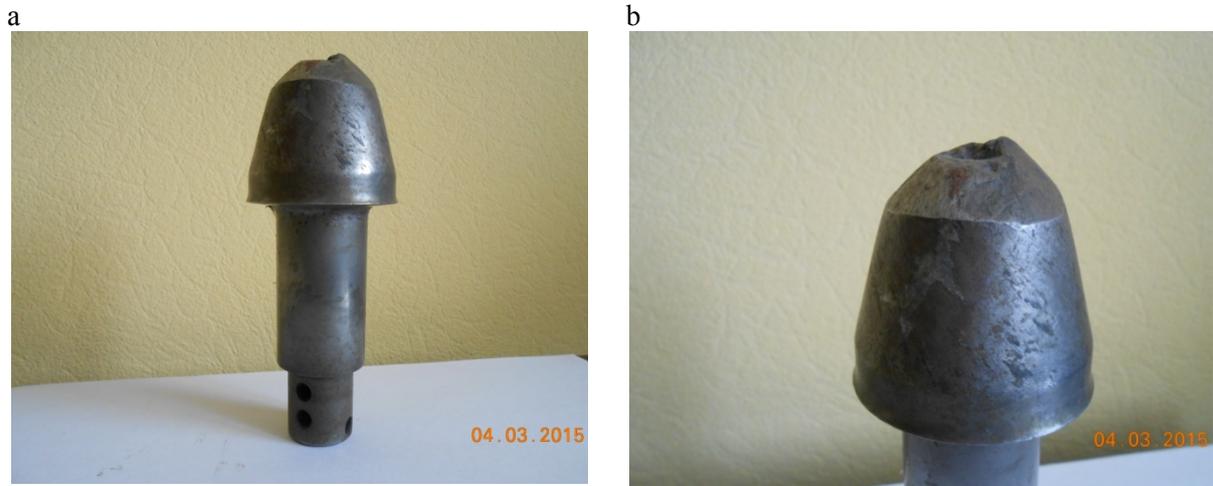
Worn out coal mining machine cutter (a) and its head (b)
